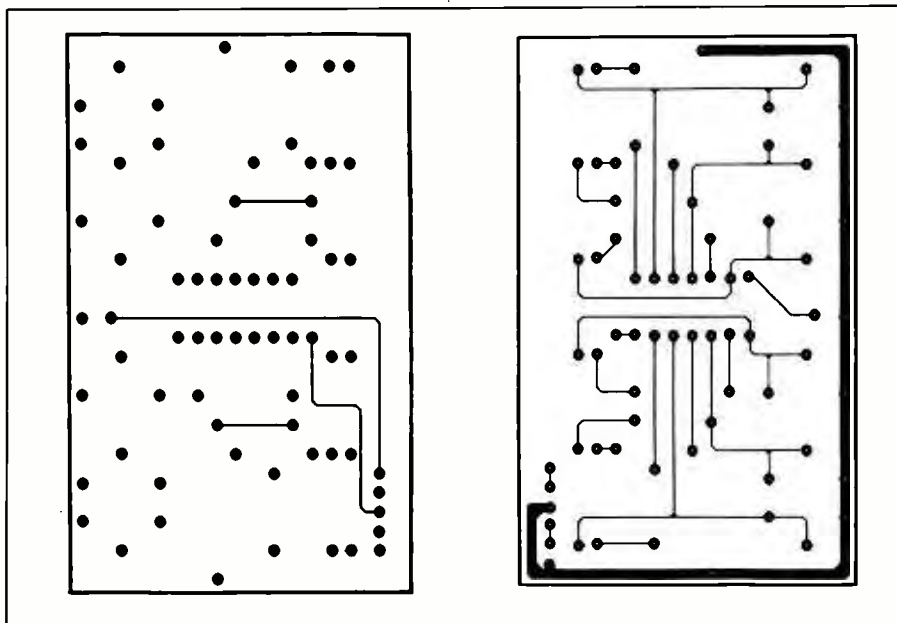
Actual-size etching-and-drilling guides for top (left) and bottom (right) of double-sided printed-circuit board.
